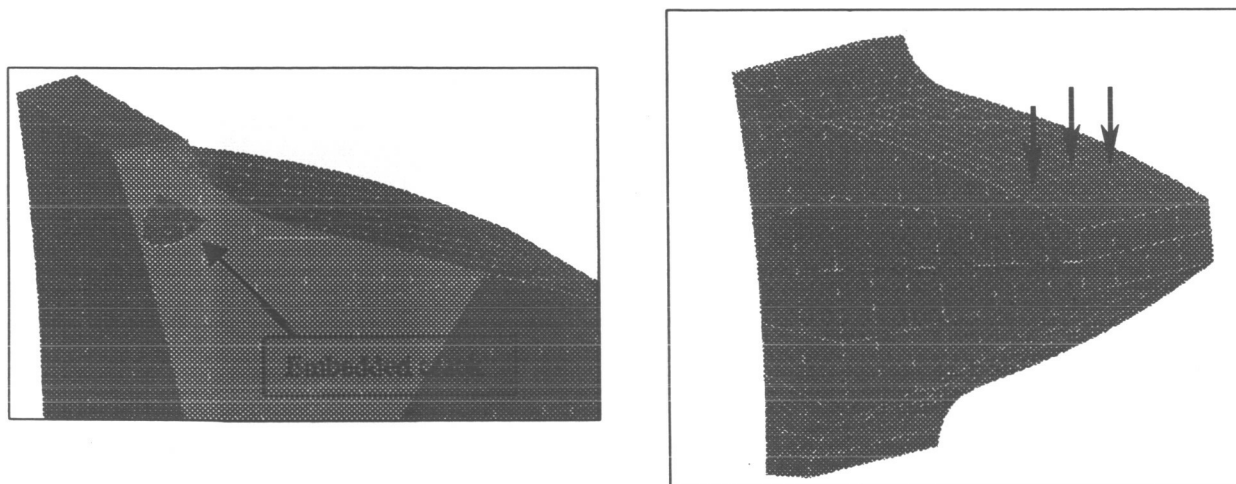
Boundary element model of titanium gear tooth. Embedded semi-circular crack shown located near root of gear tooth.
